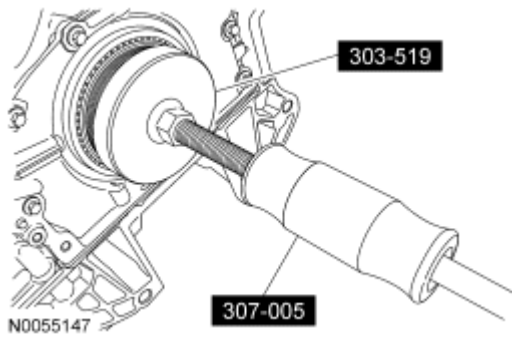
Removing Crankshaft Rear Seal Using Special Tools (303-519) & (307-005)
